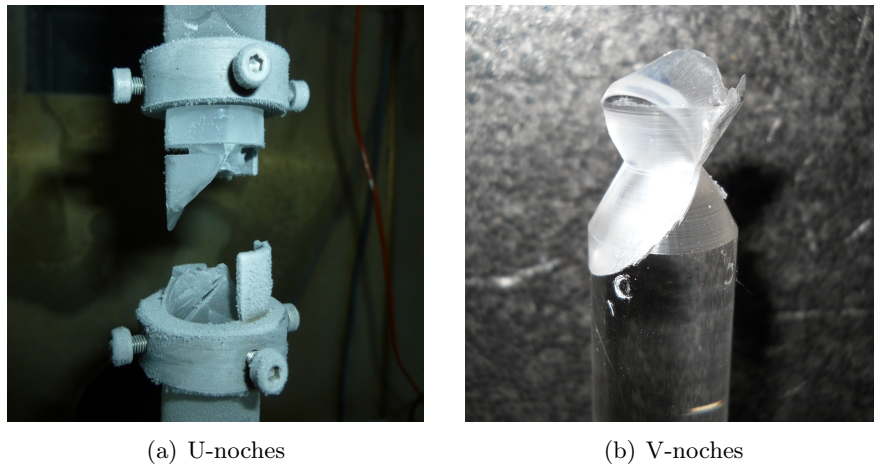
Bad failures for a) a U-notched specimen and b) a V-notched specimen.
